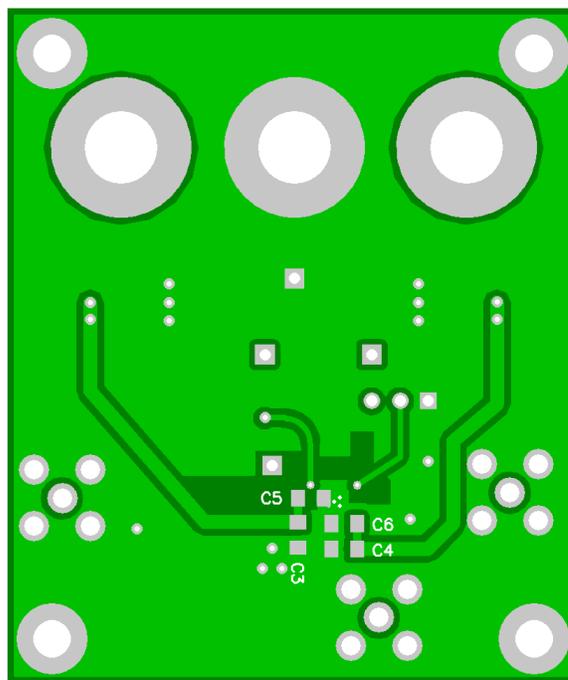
THS3120 EVM Board Layout (Bottom Layer)
